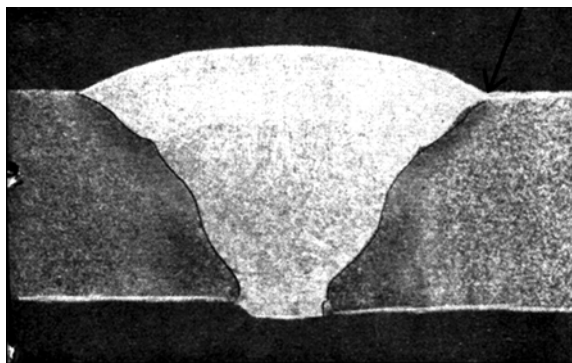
Macrosection of circumferential welded joint produced by manual electric arc welding: location of a stress raiser coinciding with JZ is indicated by an arrow
